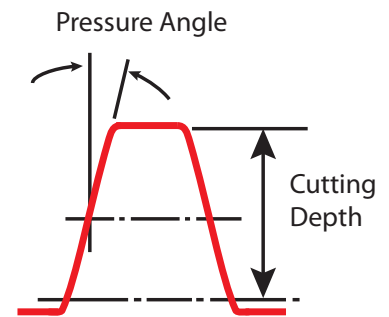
In its simplest form, the hob tooth takes on the shape of a straight-sided rack tooth.
